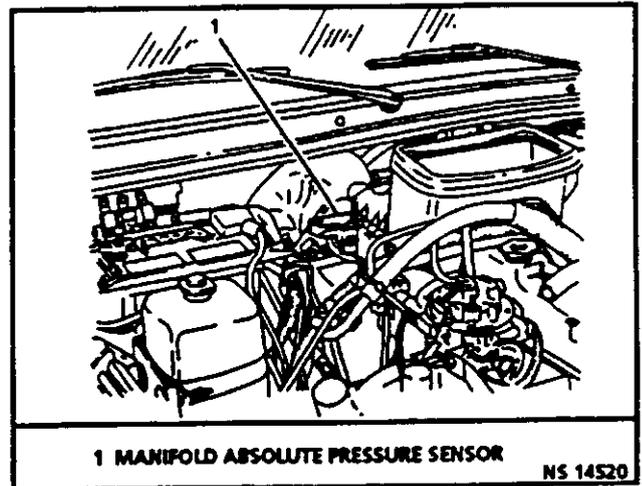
Manifold Absolute Pressure Sensor Location
